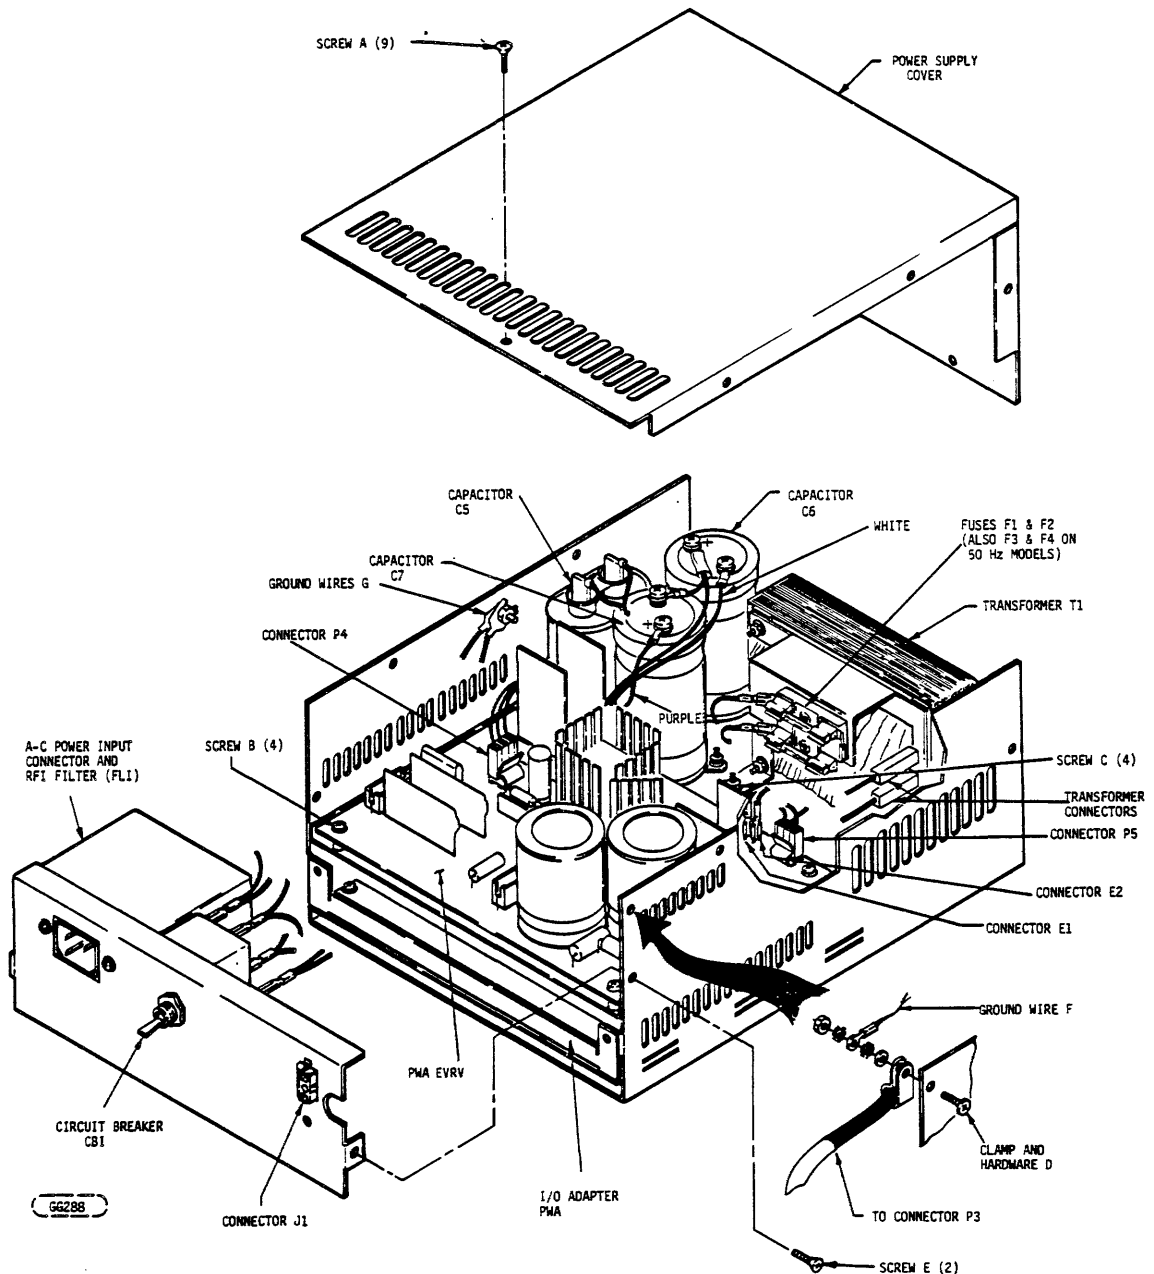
PIO ASSEMBLY SHOWING REMOVABLE COMPONENTS
